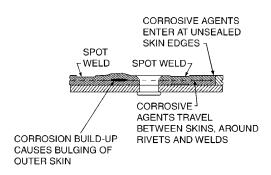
Spot Welded Skin Corrosion Mechanism
